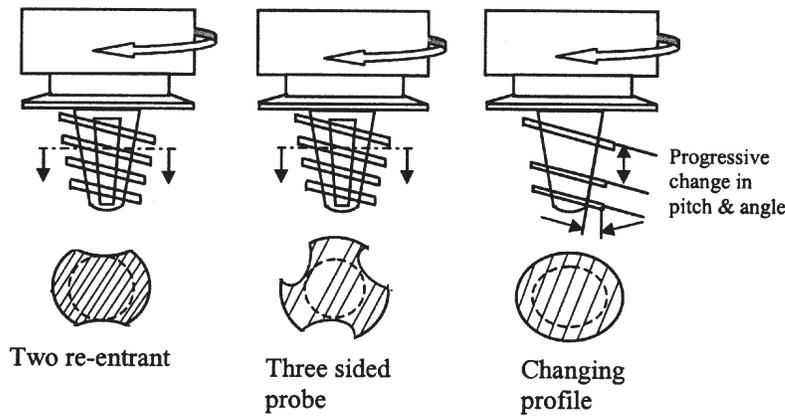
Basic variants of FSW tools for welding thick work-pieces [3].
